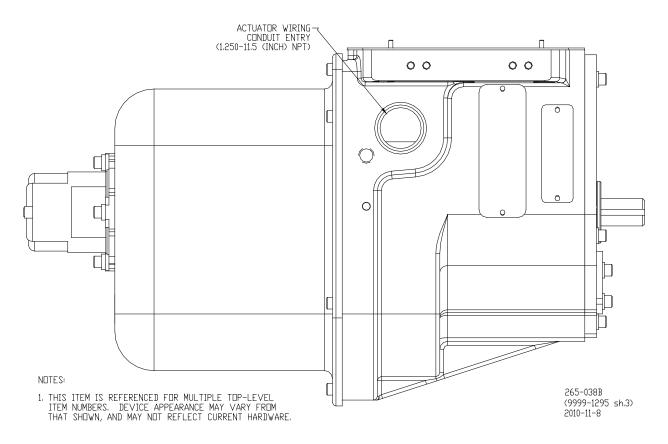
RVP-200 Actuator (Gearbox) Wiring Diagram
